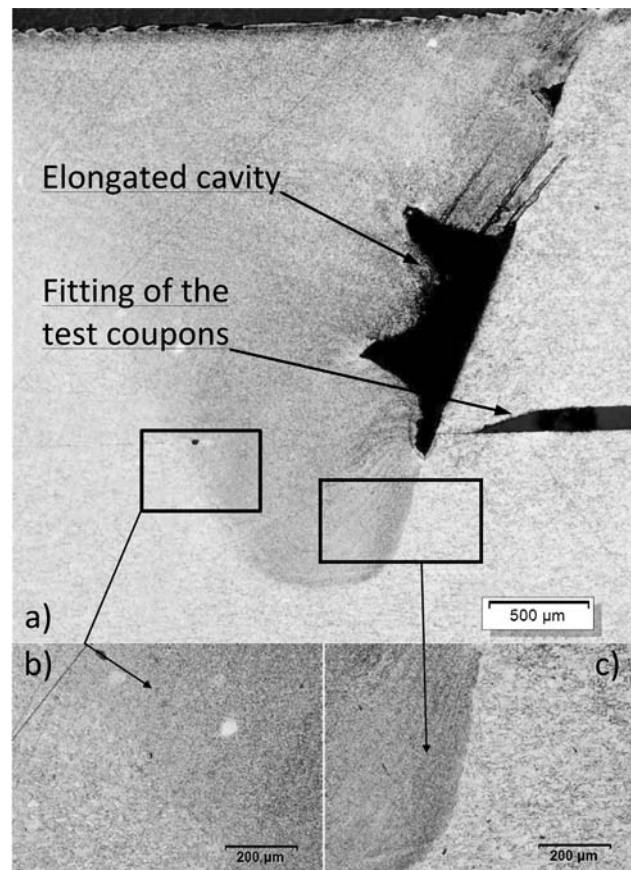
FSW weld microstructure (tool A, RPF = 10,1 rev/mm, 116 mm/min, 3°): a) the whole weld, and the interface between stirred zone and base metal b) retreating side and c) advancing side of the tool
